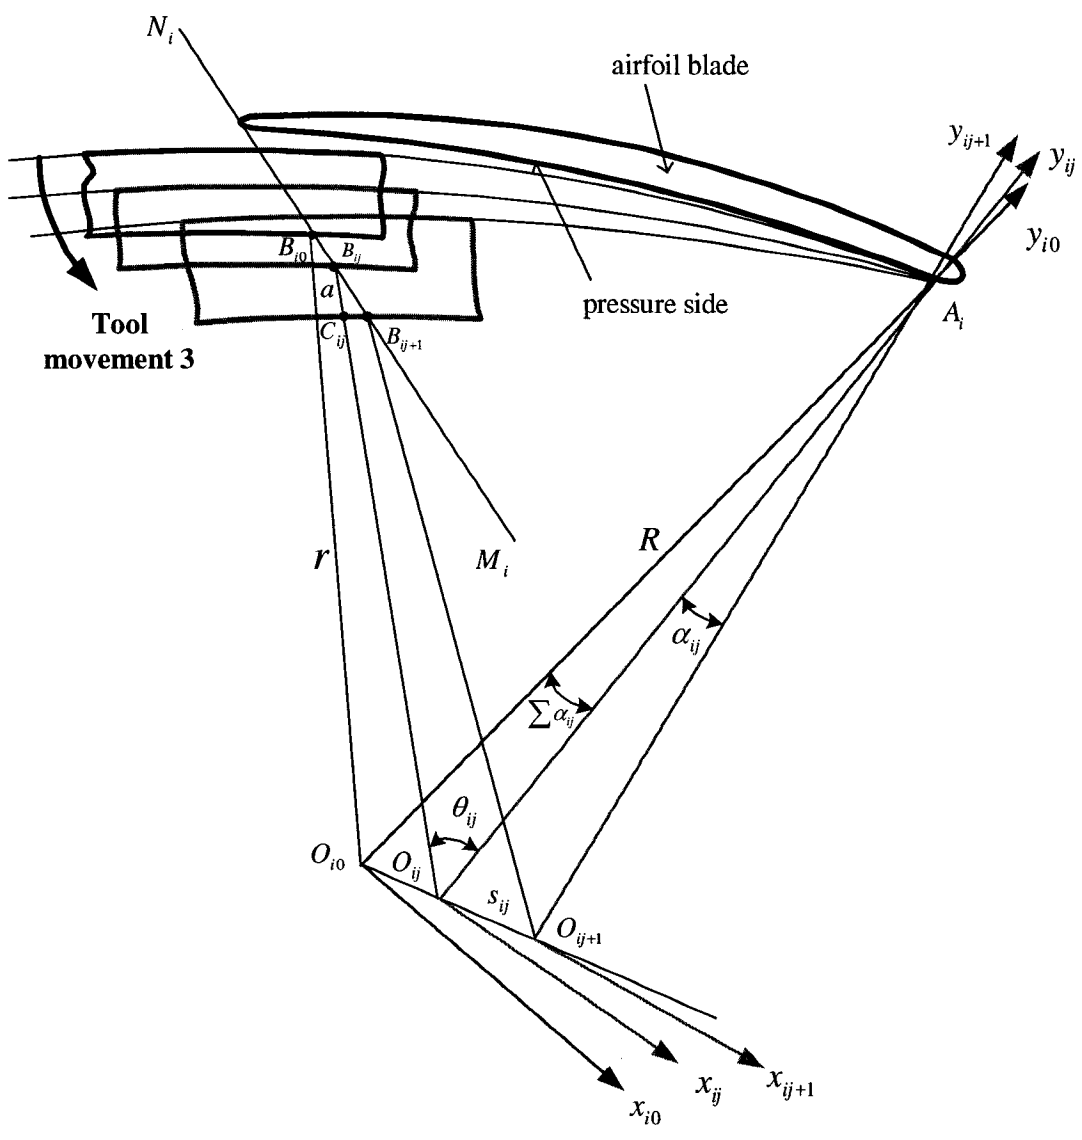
Tool movement 3 - the rotation of the tool centre around the exterior point,  $A_i$ , and the machining done with the inner side of the tool
